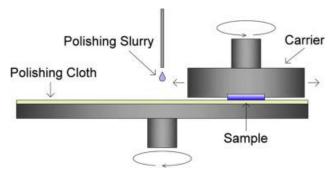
CMP schematics reproduced from reference [212], a planetary movement of the sample is obtained with the carrier and plate rotation. Polishing slurry is poured while the tool operates.
